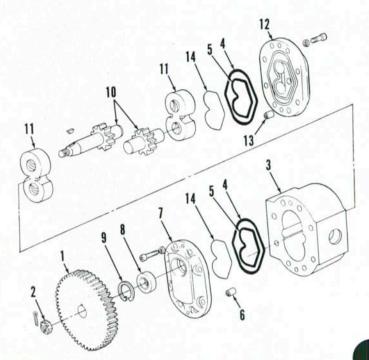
Exploded view of hydraulic pump used on Models TW-5, TW-15, TW-25 and late production TW-35 (March 1984 and after).
